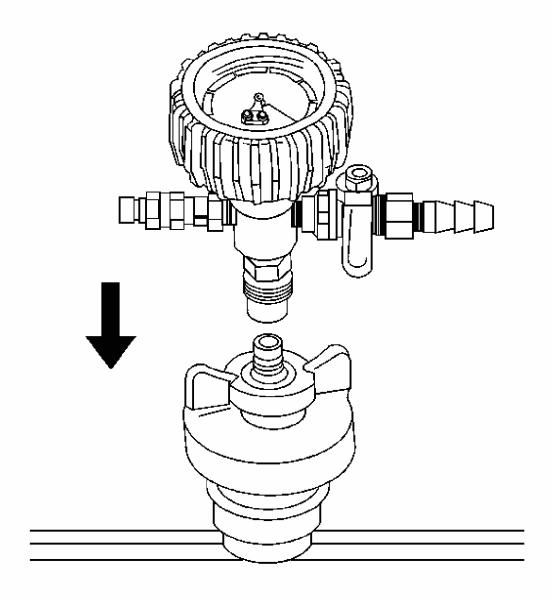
Attaching The Vacuum Gage Assembly To The Vac N Fill Cap Courtesy of GENERAL MOTORS CORP.
